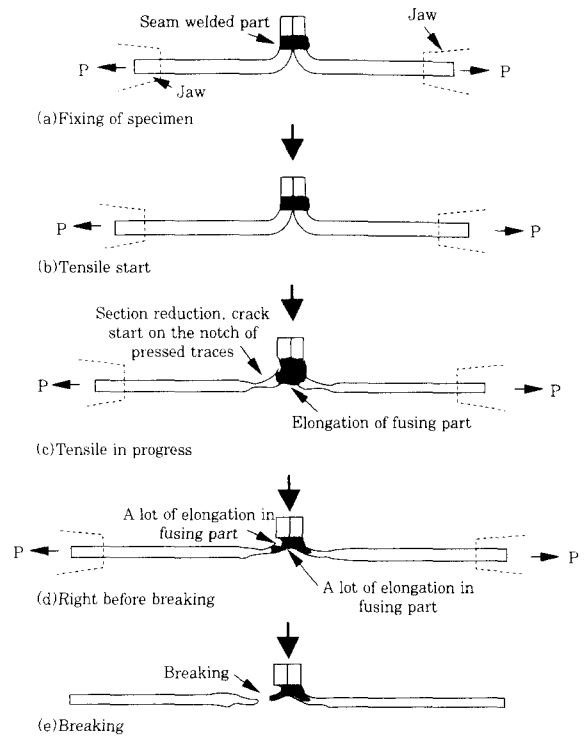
Macrofractographs in tensile shear inspection of flange seam welding
